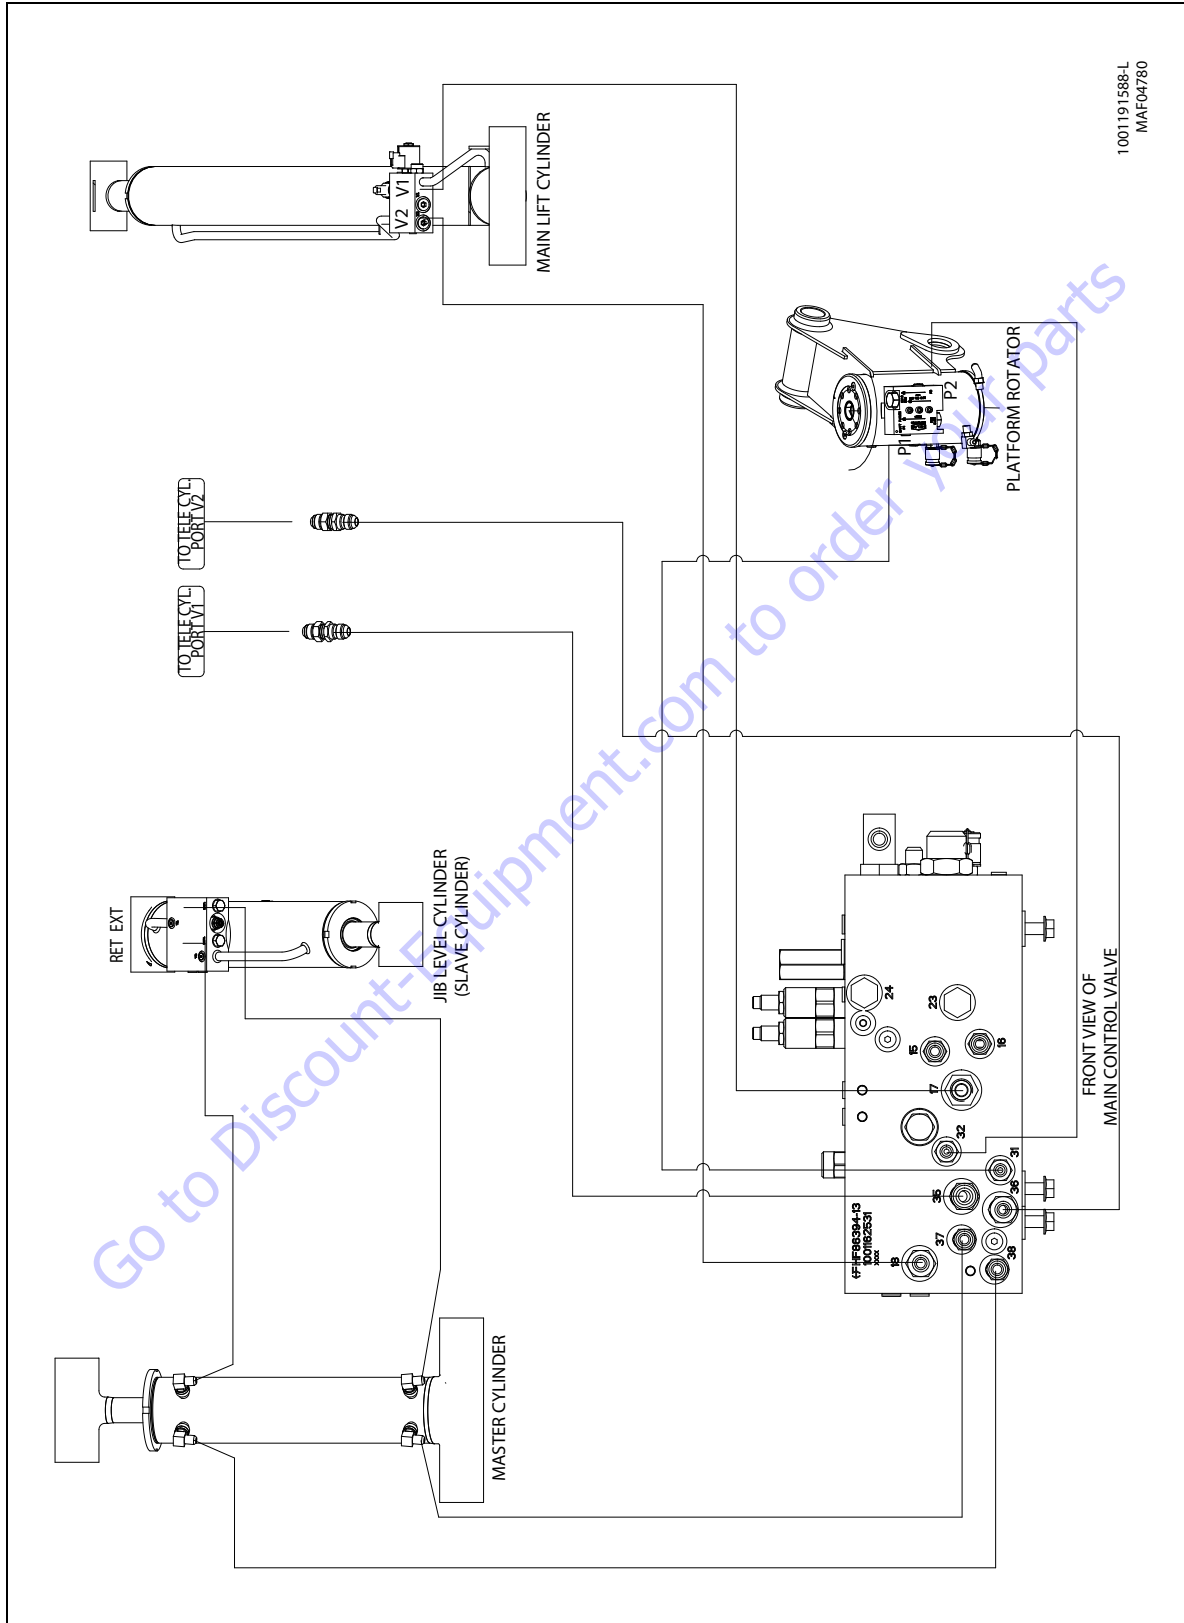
Hydraulic System Installation (400SC) - Sheet 4 of 16
